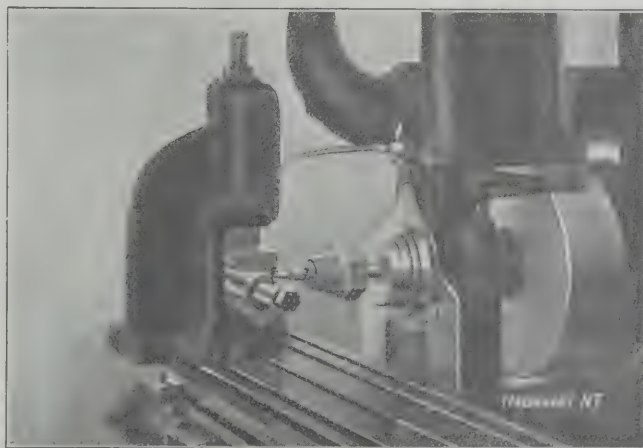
Upright V-vise for Holding Shafts which are being milled for Woodruff Keys
